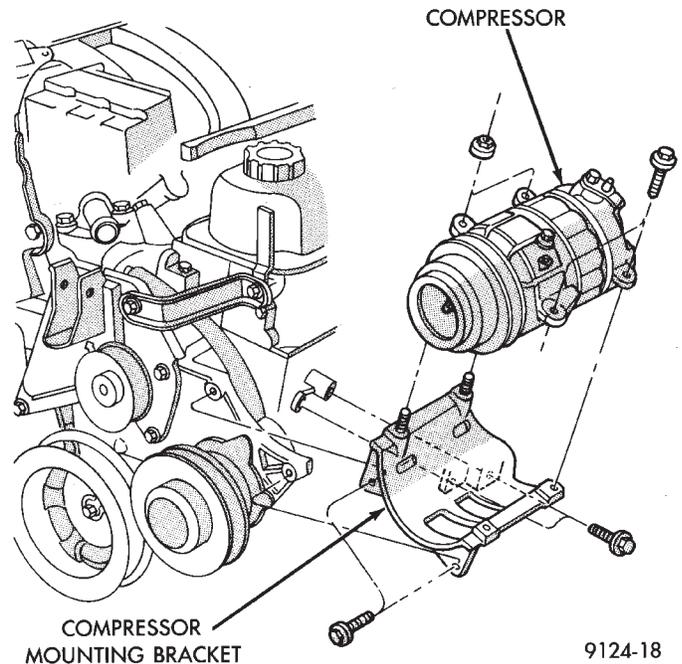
A/C Compressor Removal and Installation—3.3L Engines
